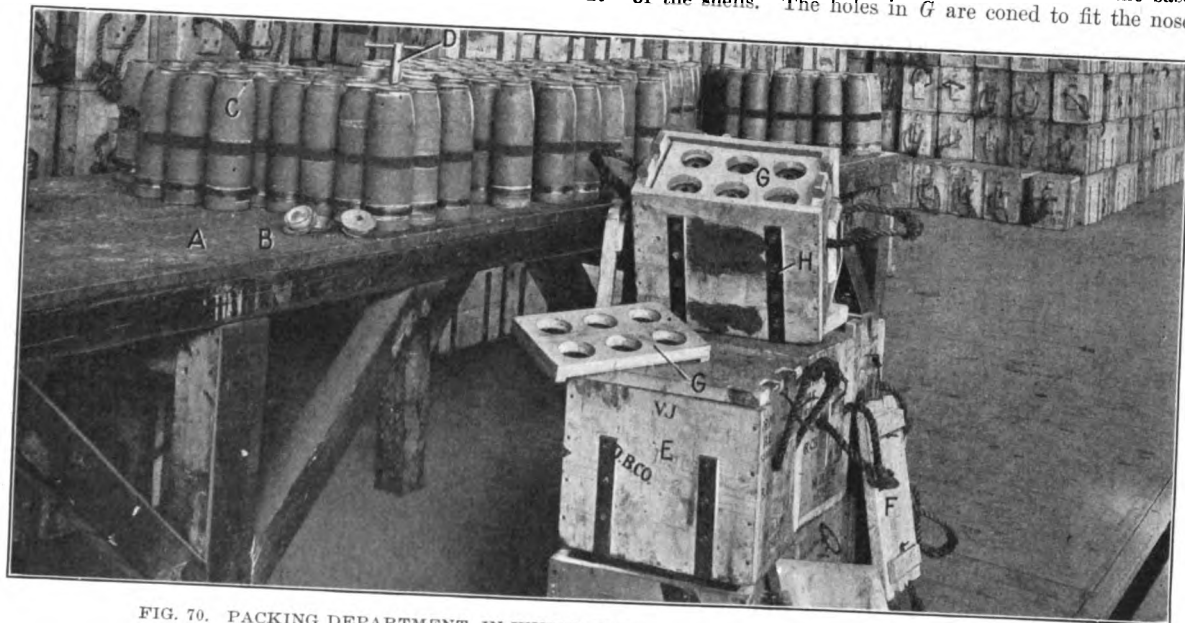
PACKING DEPARTMENT, IN WHICH PLUGS AND GRUB SCREWS ARE ASSEMBLED
